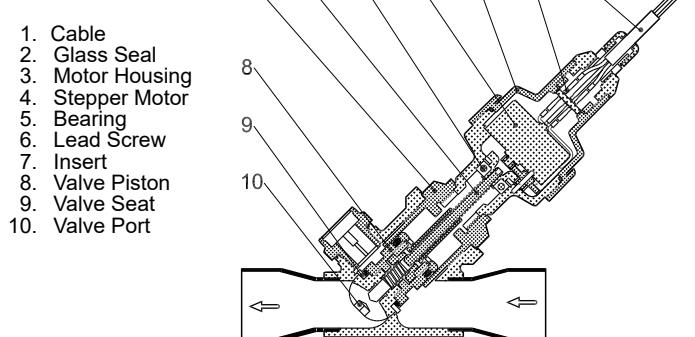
Cutaway Views of the Electronic Expansion Valve
